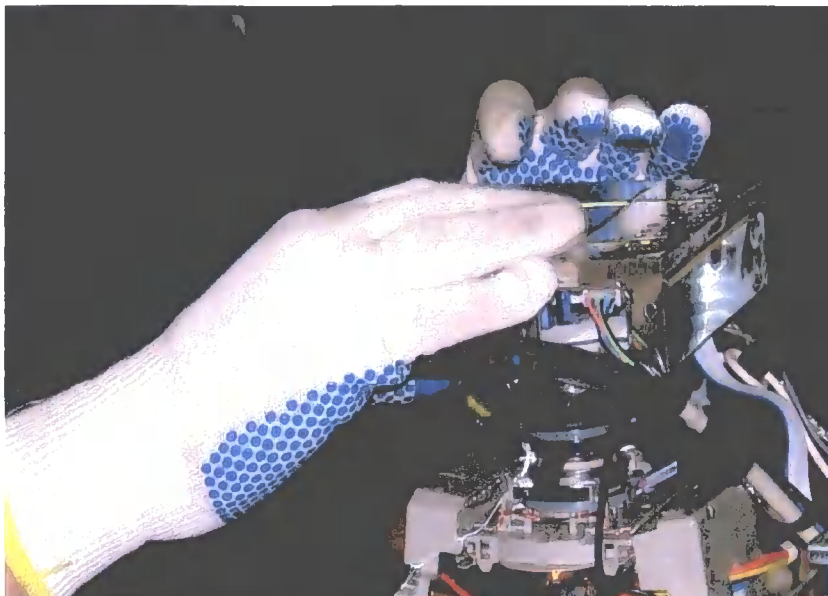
Printed Board Assembly PBA Fit / Earthwires
